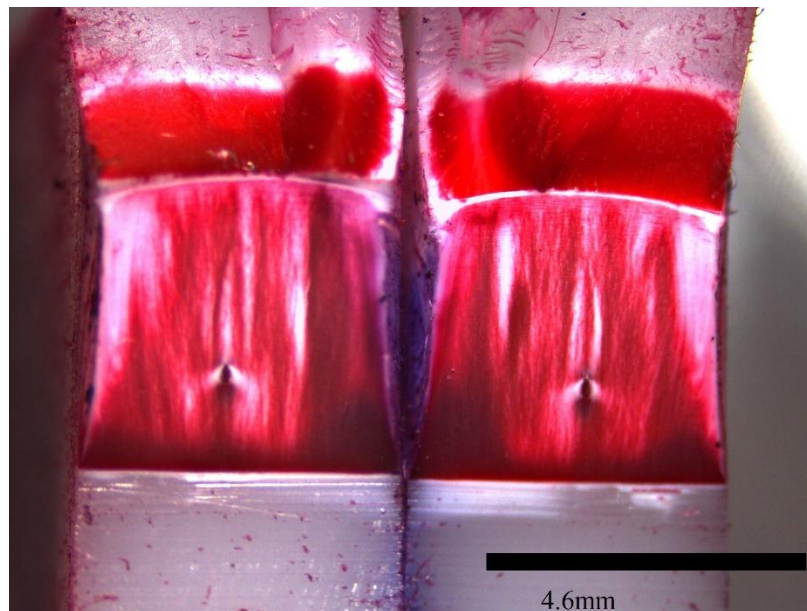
Fracture surface of a medium sized PVDF B specimen with dye penetrant applied and with 10x magnification.
